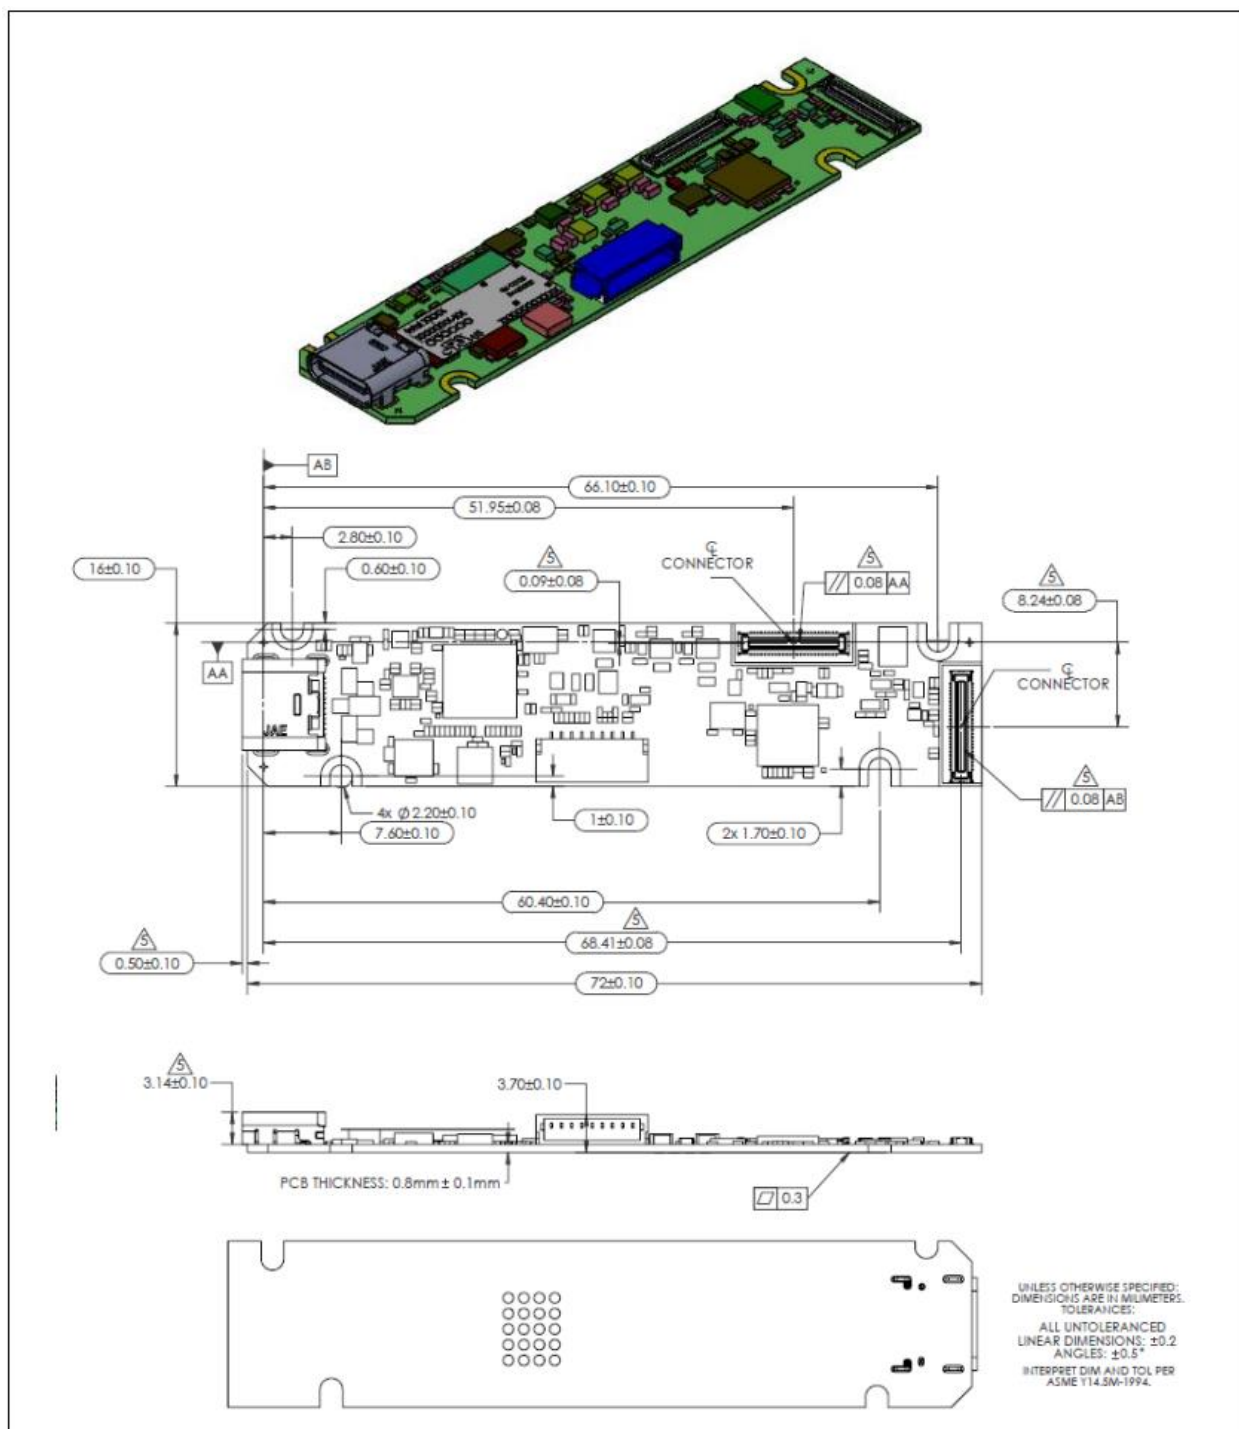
Mechanical drawing of D4Vision Processor board. Source: [37].
